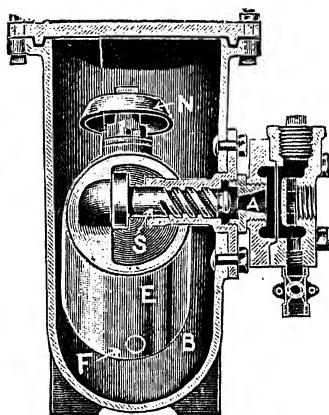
Lancaster Steam Trap: 1903 Type—End Elevation.
